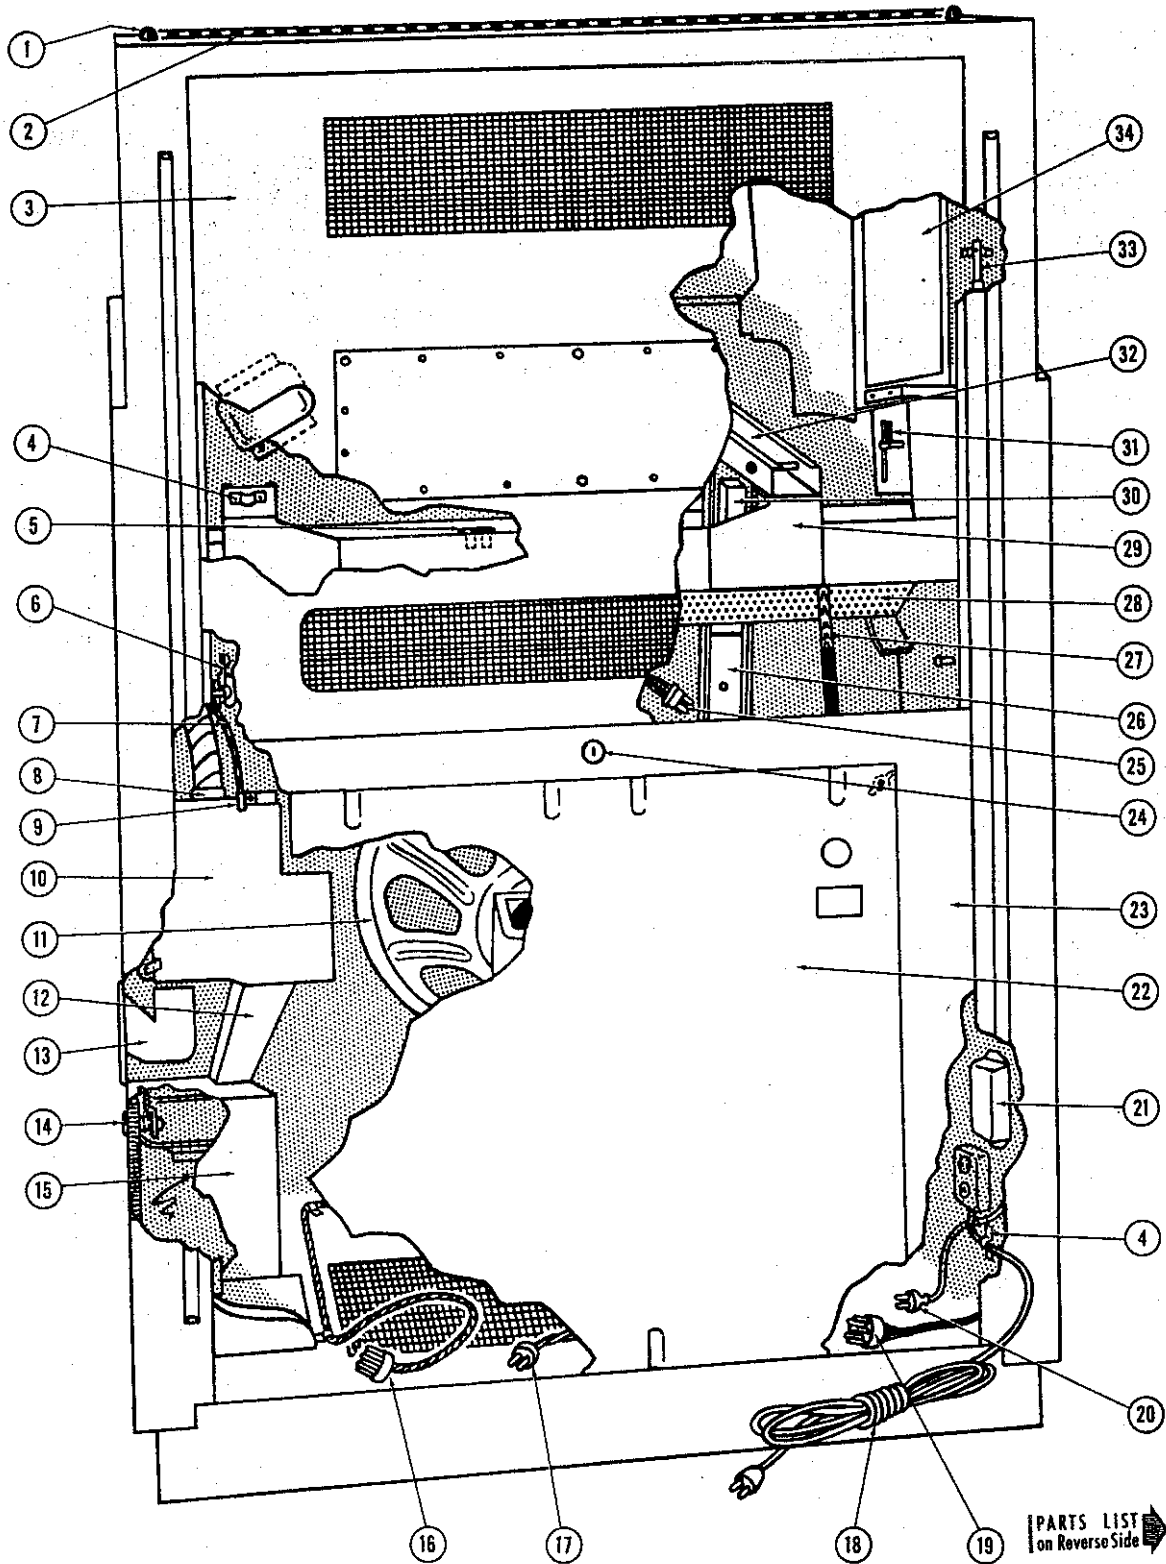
FRONT VIEW - M100B CABINET ASSEMBLY. #40'50'38
